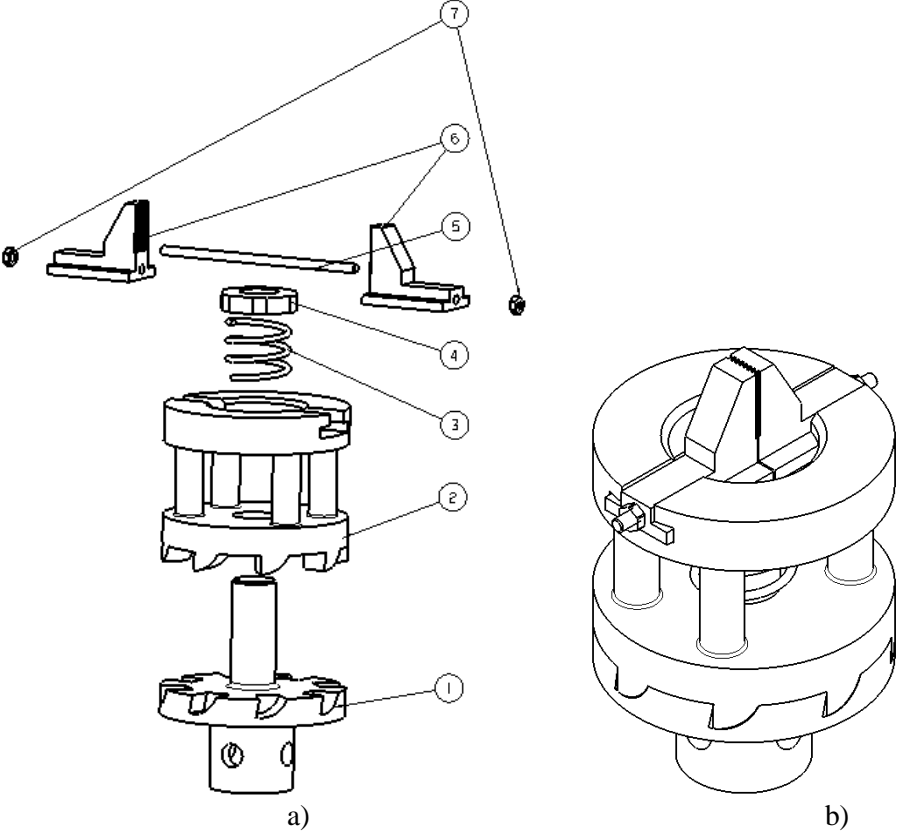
a) tensile-torsion device exploded assembly view; b) tensile-torsion device isometric view
